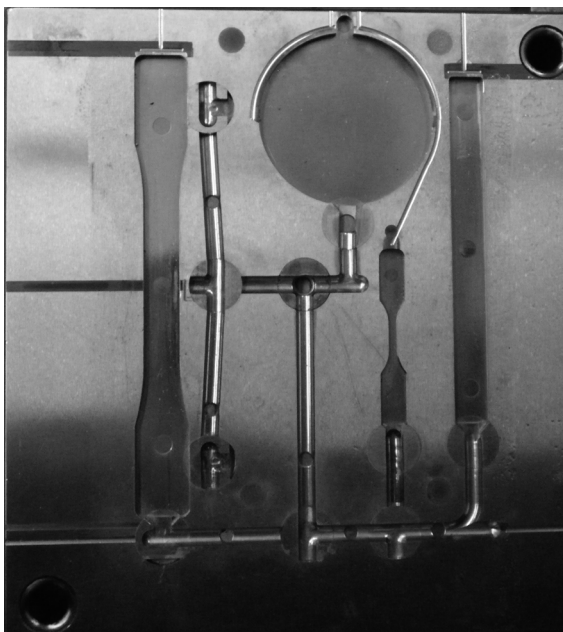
Four-Cavity Mold Used in Injection Molding
